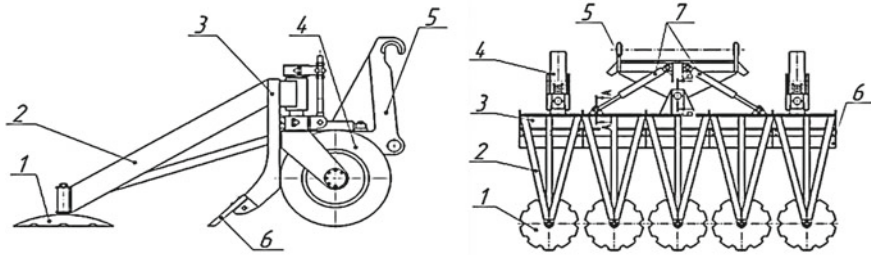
Ice-cutting working body: 1—disc cutter with notches; 2—frame; 3—blade; 4—castor; 5—mount; and 6—mouldboard blade
